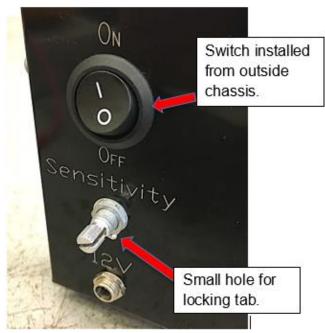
Assembly of panel-mounted components. Note potentiometer locking tab/hole alignment.
